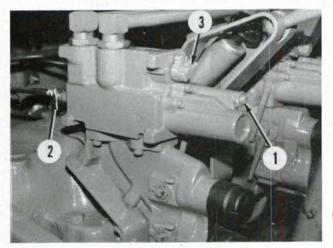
Remote valve detent pressure is adjusted by turning adjusting screw (1).
